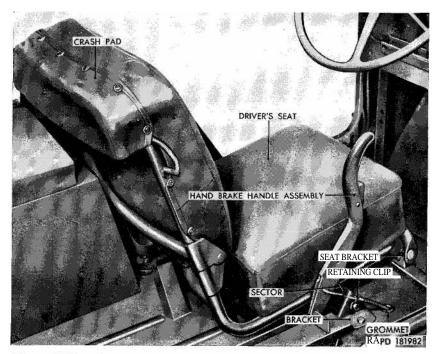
(Added) Hand Brake Handle and Driver's , cal Assemblies 1117 Installed.
